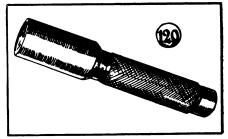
Tool for driving roller hearing sleeve on propeller shaft
